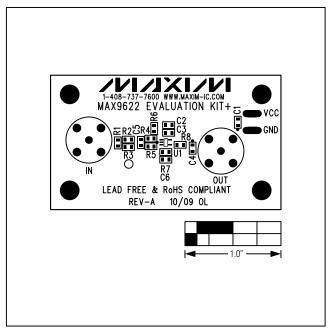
MAX9622 EV Kit Component Placement Guide—Component Side
